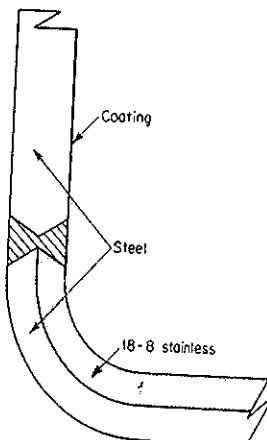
Detail of welded steel and stainless clad tank construction.
